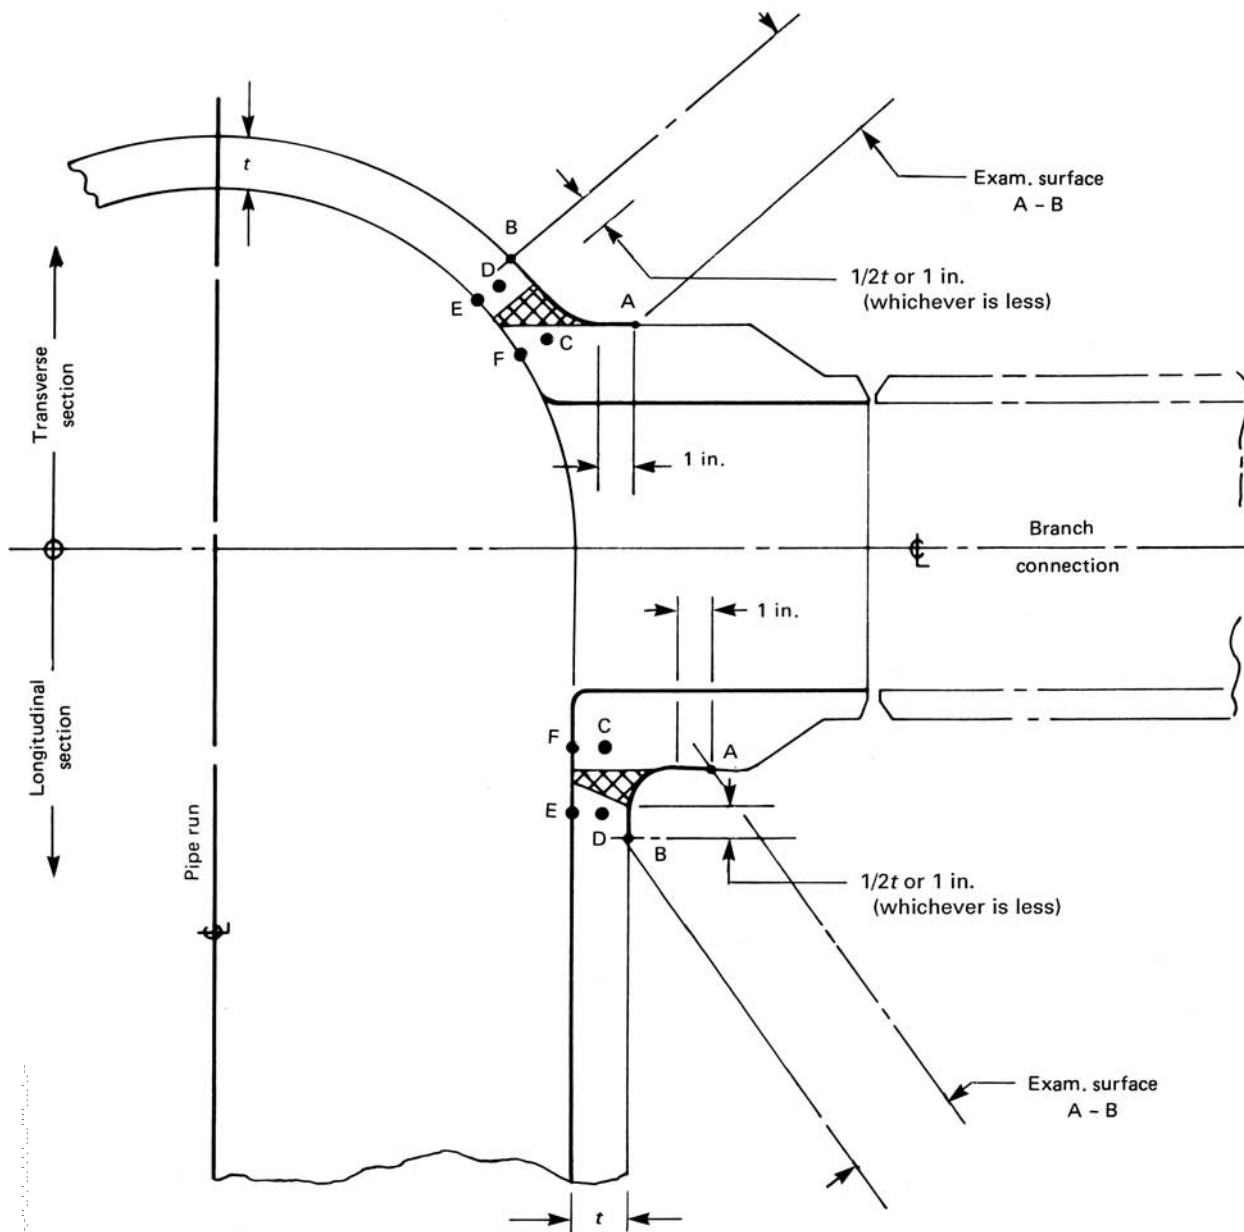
PIPE BRANCH CONNECTION
